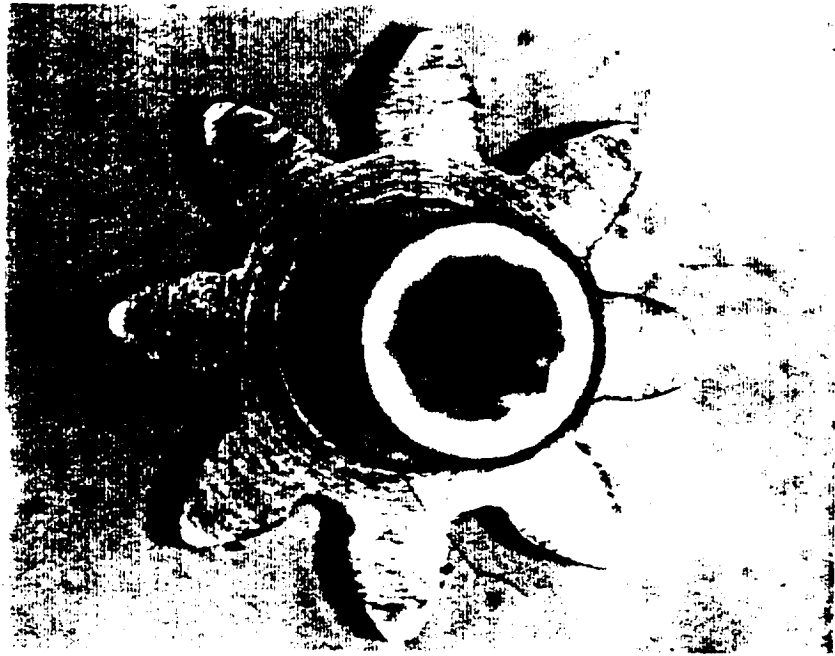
Top plate side of the 718 drive gear showing minor scoring and minor damage to the leading edge of the tooth.
